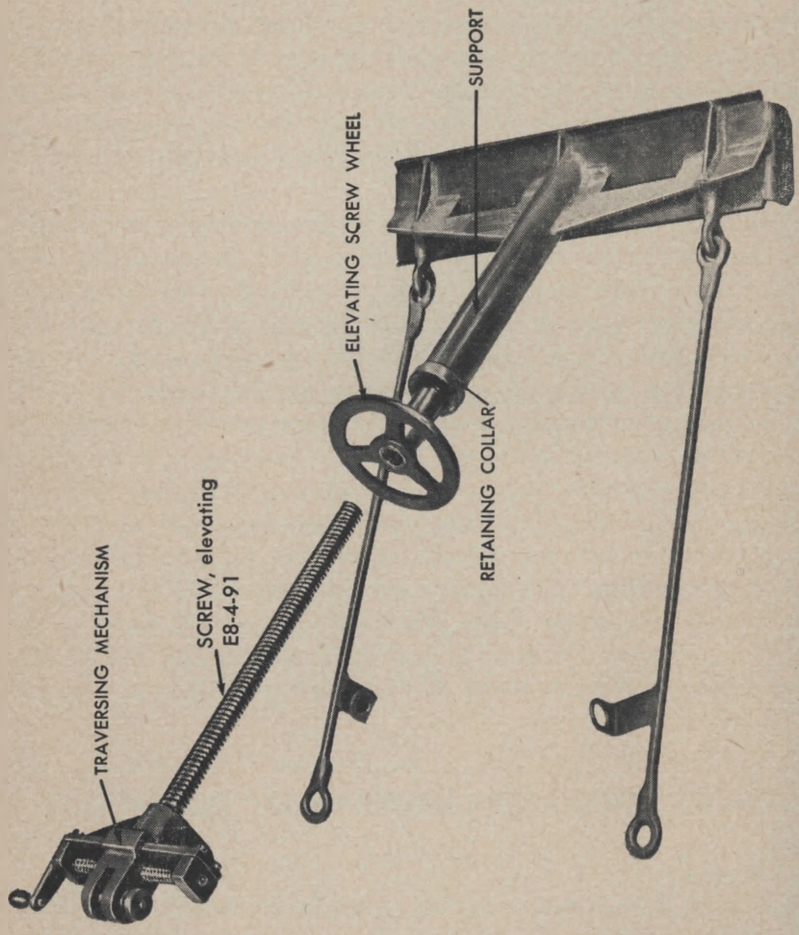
Exploded view of elevating and traversing mechanisms in relation to standard.
